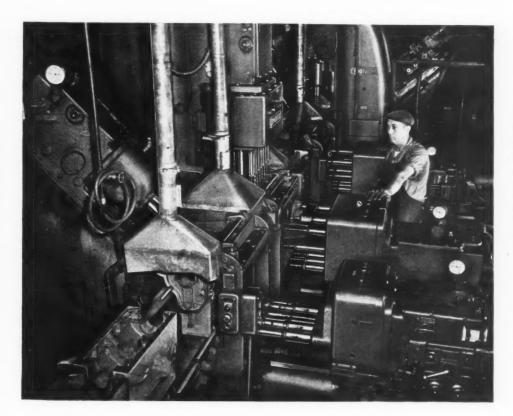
Ninety-one Spindles are Provided on This Ten-station Transfer Type Machine for Drilling, Counterboring, Chamfering, and Spotfacing the Cylinder Blocks at the Rate of Fifty per Hour
